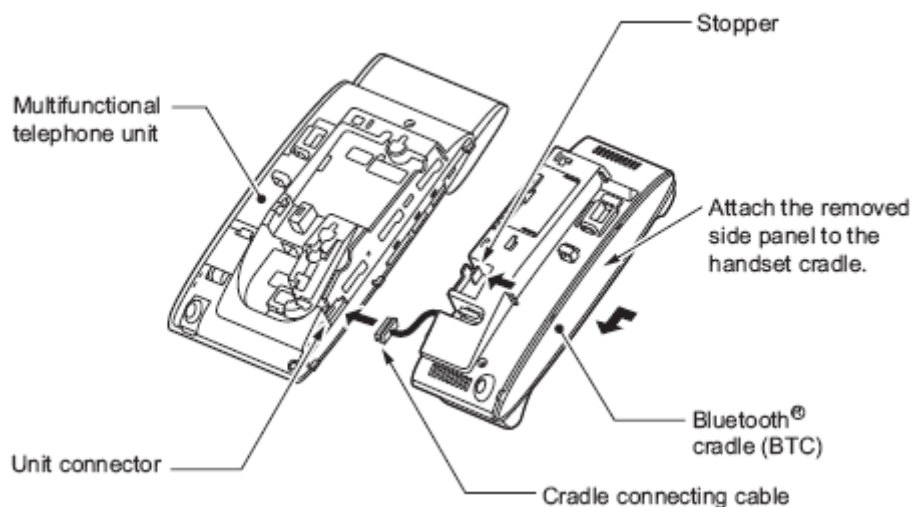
Attach Bluetooth Cradle to the Multiline Terminal
